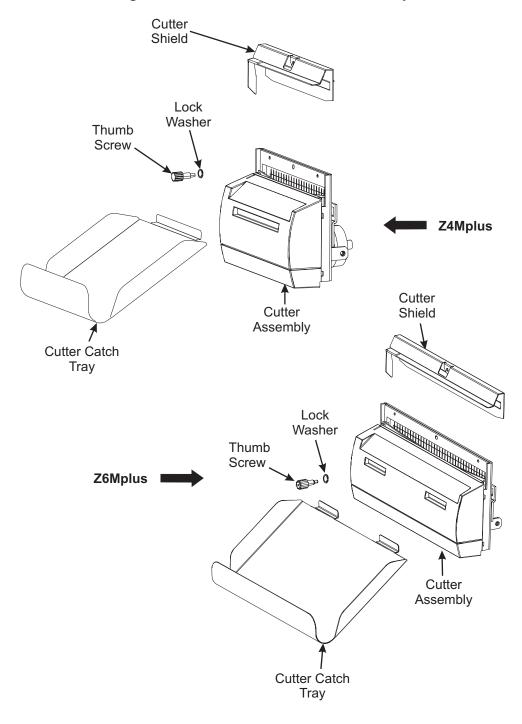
Install the Cutter Assembly (Z4Mplus Shown)
